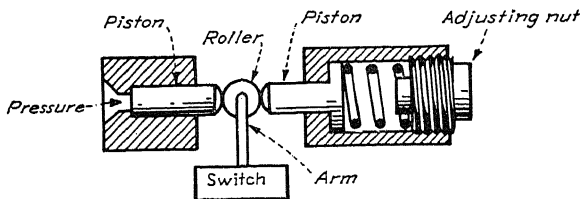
Pressure switch. (Courtesy of Product Engineering.)
